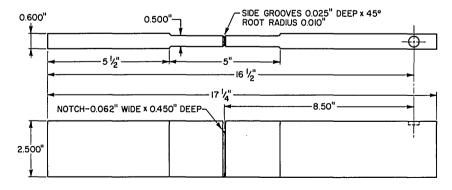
Dimensions of single-edge-notch cantilever fatigue specimen
